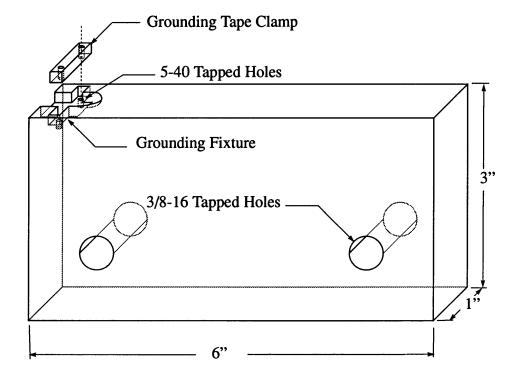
Vise Face, showing measurements and details. Two faces were manufactured; only one with a Grounding Fixture.
